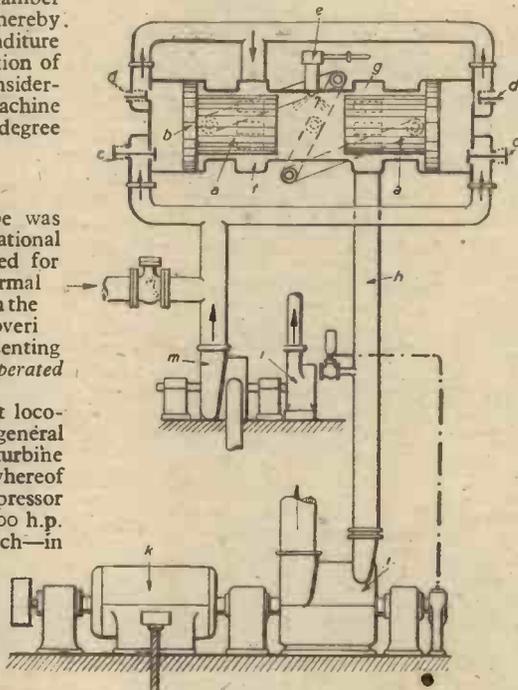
Diagram of a Sulzer engine and turbine plant in which the propelling gas is obtained from an engine without crankshaft or so-called "free piston engine." (a) Diesel piston. (b) Compressor piston. (c) Suction valve. (d) Compression valve. (e) Injection nozzle. (f) Inlet port. (g) Exhaust port. (h) Propelling gas pipe. (i) Gas turbine. (k) Generator. (l) Auxiliary turbine. (m) Preliminary compressor.
